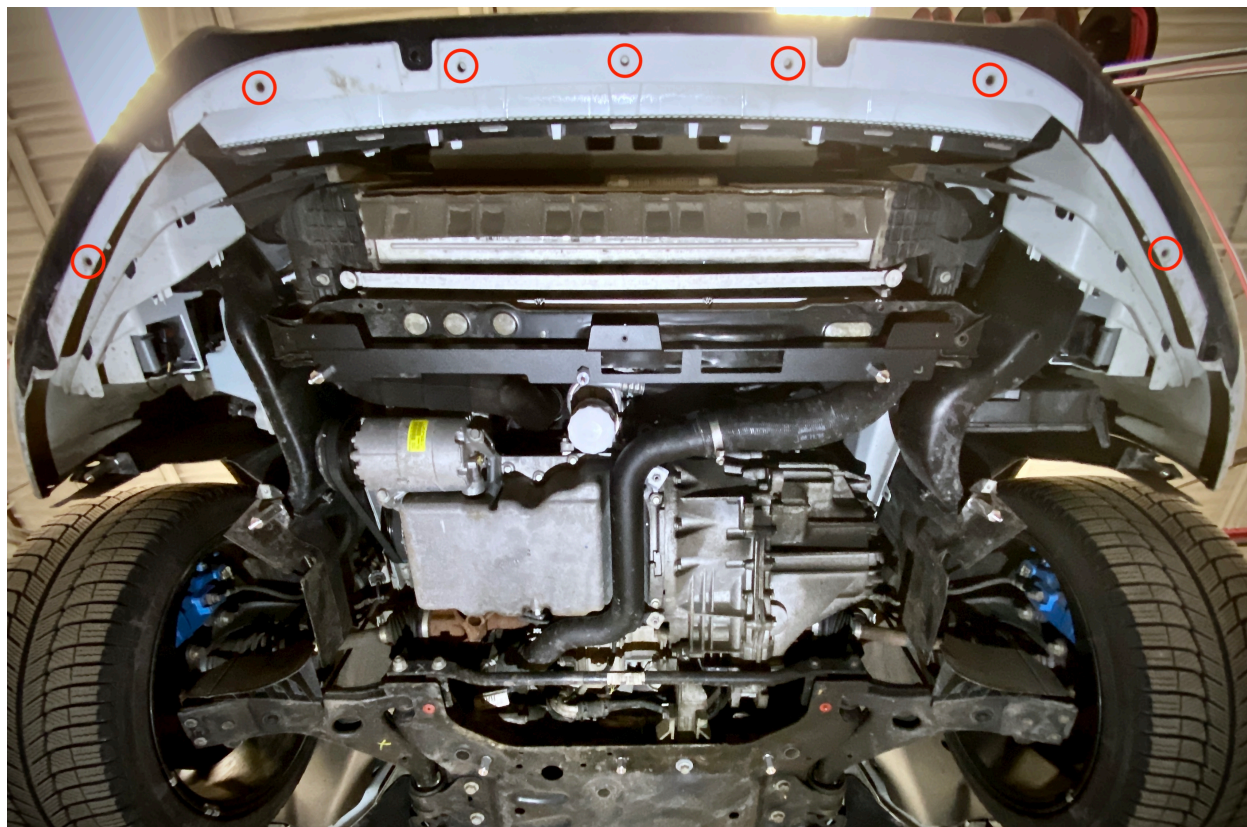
FASTENER LOCATIONS; MOUNTING BRACKET
